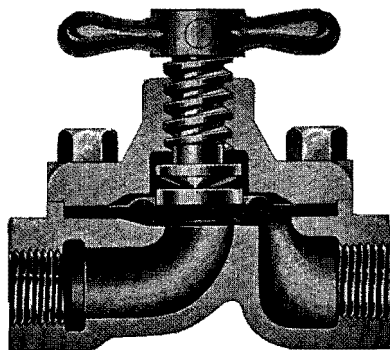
Sectional View of the $\frac{3}{4}$ " Quick Opening Diaphragm Cock with Lever Type Handle
